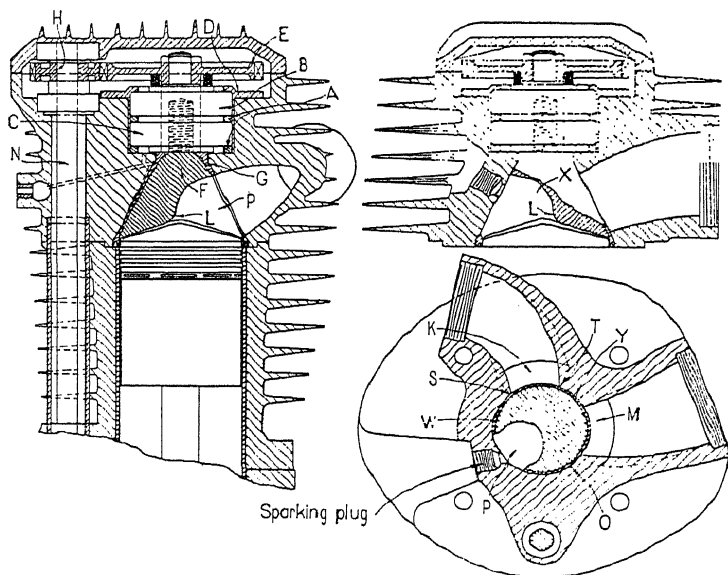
Cylinder head showing rotary valve and piston of the Aspin engine.
